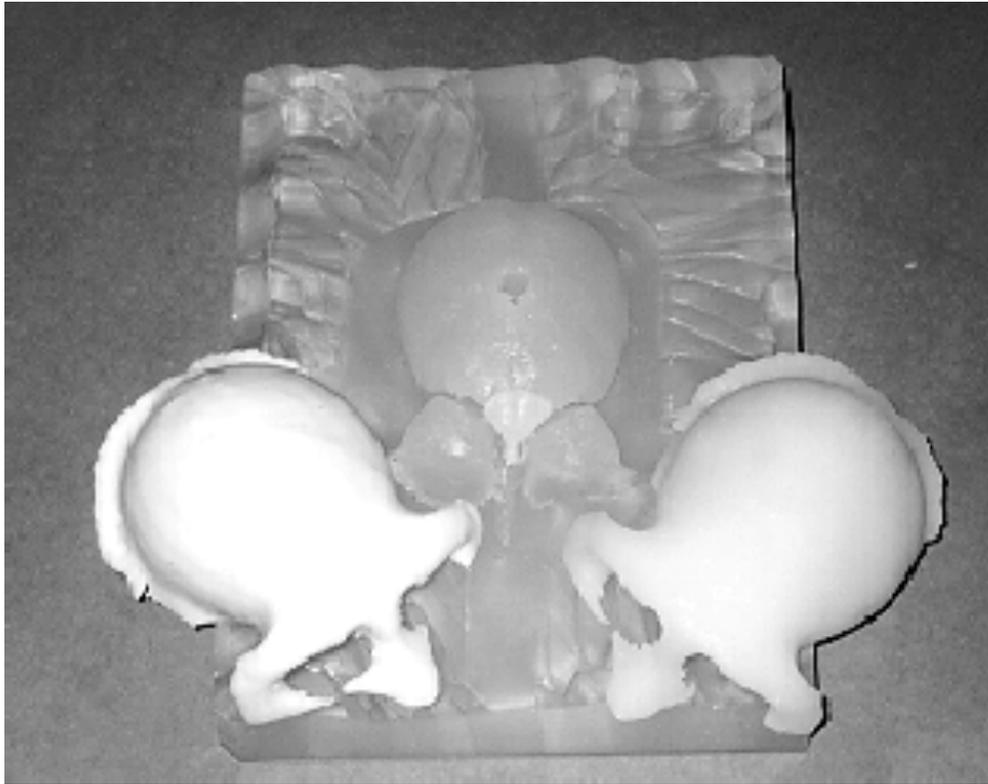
Silicone mold and polyurethane SG200 and 2120 replicas of the monkey skull using vacuum casting.
